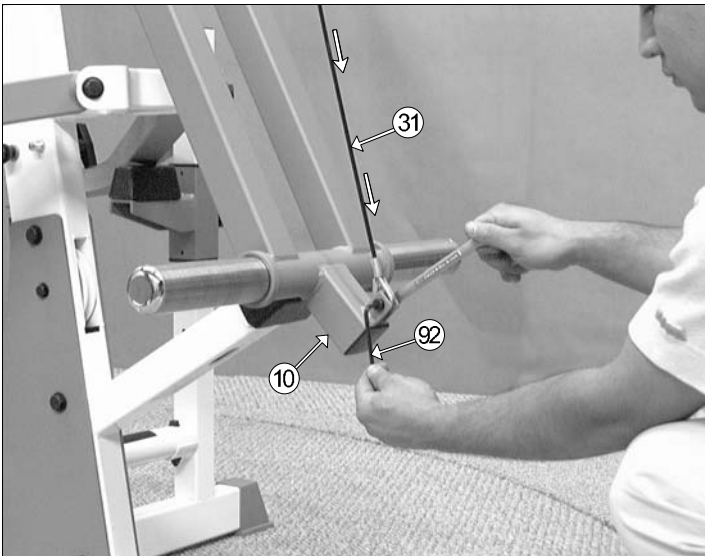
Secure the looped end of the Lat Cable (#31) to the bracket of the Weight Carriage (#10) using one Shoulder Bolt 3/8 X 3/4 (#86), and one Nylon Insert Lock Nut 5/16-18 (#99).
